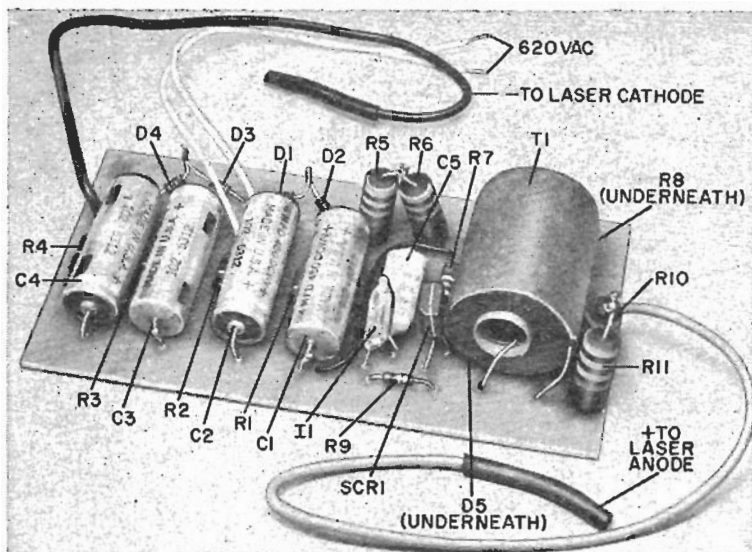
Component installation on the automatic supply PC board. Transformer T1 is an ordinary ignition coil that has plastic casing removed.
